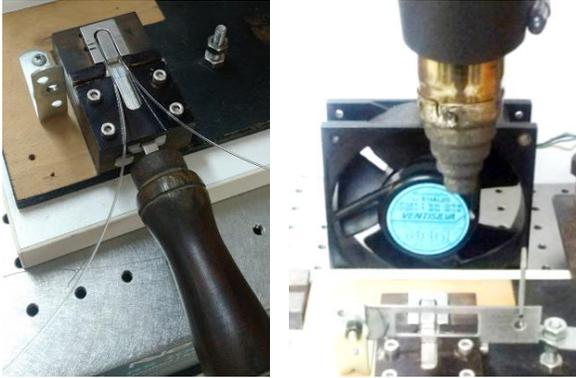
Custom-made device for molding U-Shaped probes (left). Hot-air gun and cooler used for heating and cooling the probes (right).
